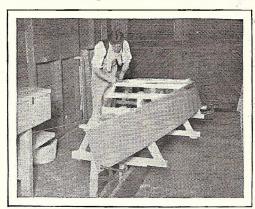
The strongback is lowered to the floor. Chine pieces put around the molds and fastened to the transom. Then the bottom strake of planking is bent around and cut to shape, later being fastened.
